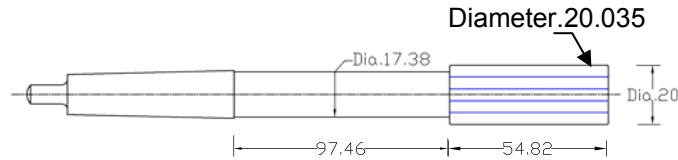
AutoCAD Drawing of a Reamer of 20 mm Diameter.
